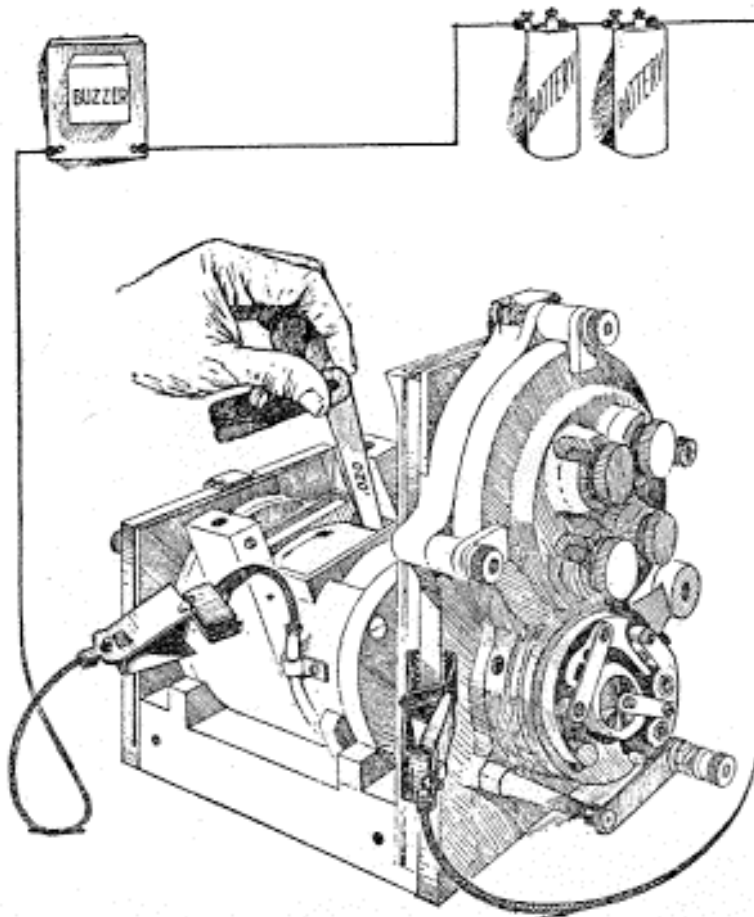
Method of connecting buzzer to magneto primary circuit, for accurately setting the relation of contact opening, to rotor position.
